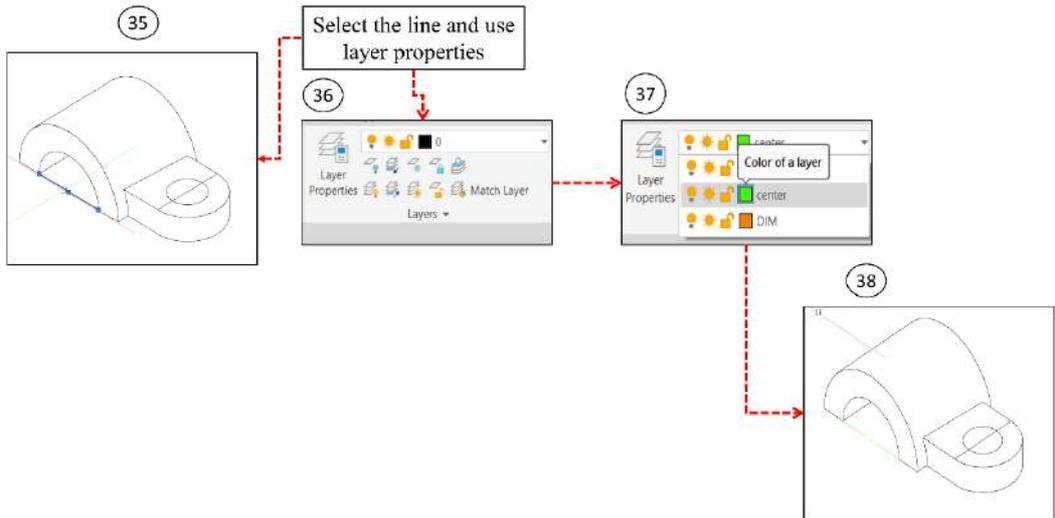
Example of an isometric drawing (Step 35, 36, 37 and 38)
